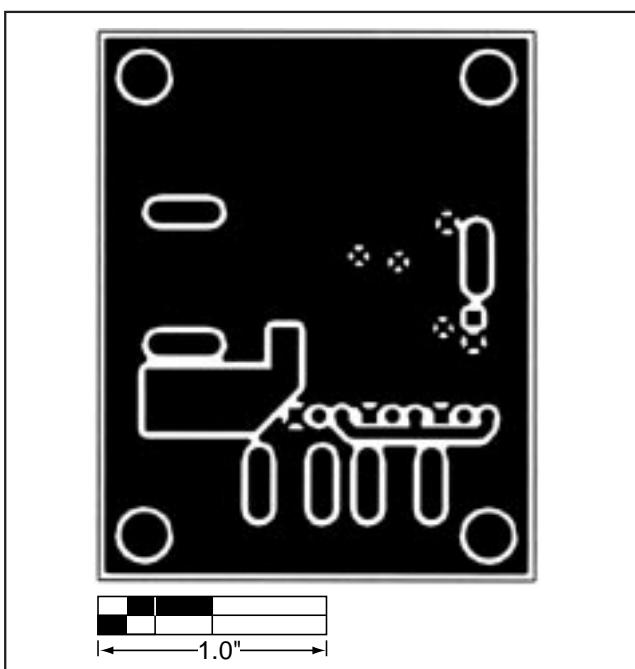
MAX685 EV Kit PC Board Layout—Solder Side
